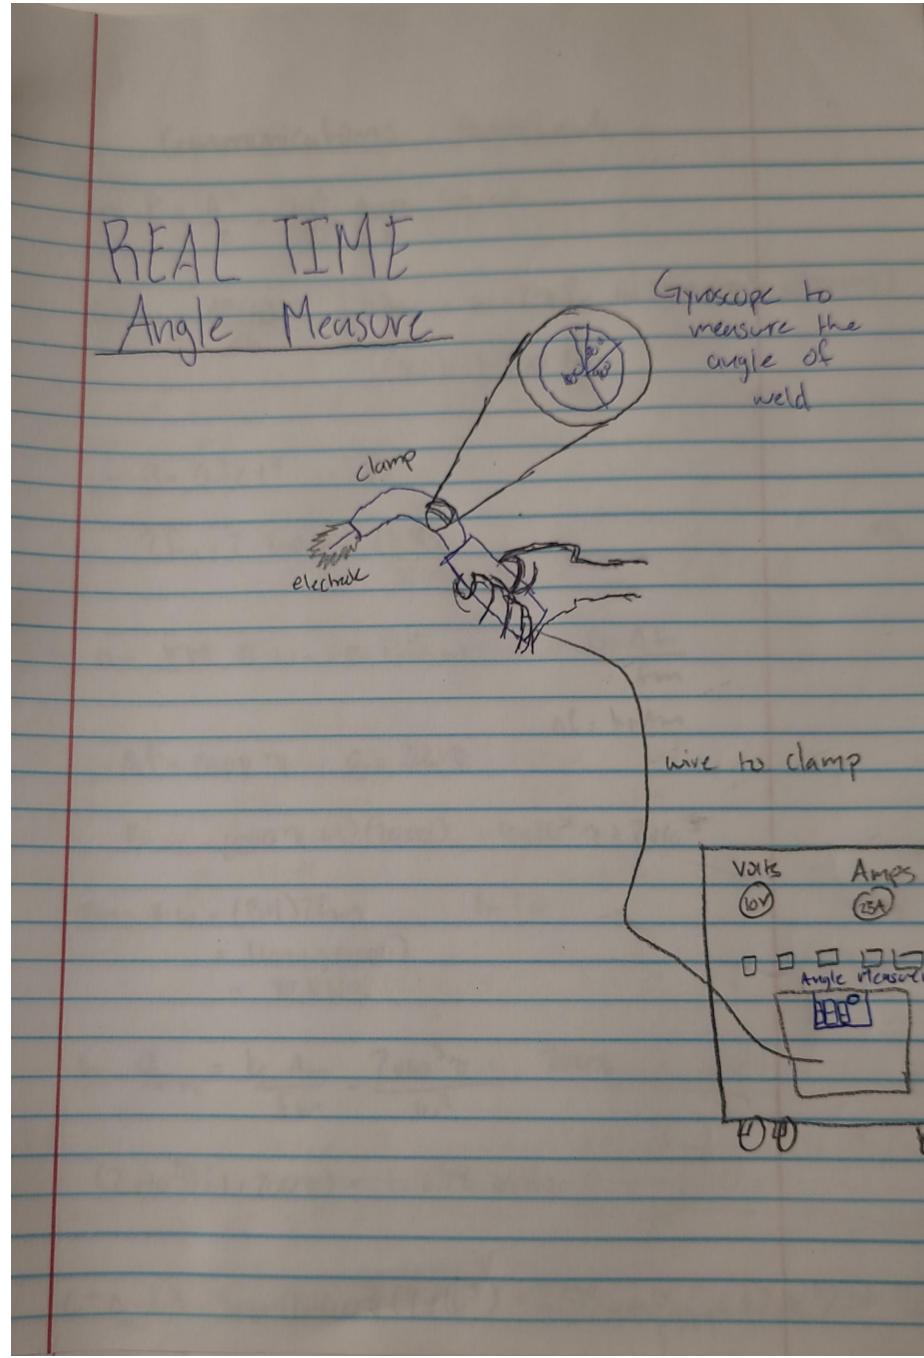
This photo demonstrates the implementation of a gyroscope on existing welding machines old clamp versions. These new clamps will be able to display the angle of the weld being done on a monitor in the front of the machine. The only component required for this is some sort of microchip that can read the data and transform it into a visible measurement.
